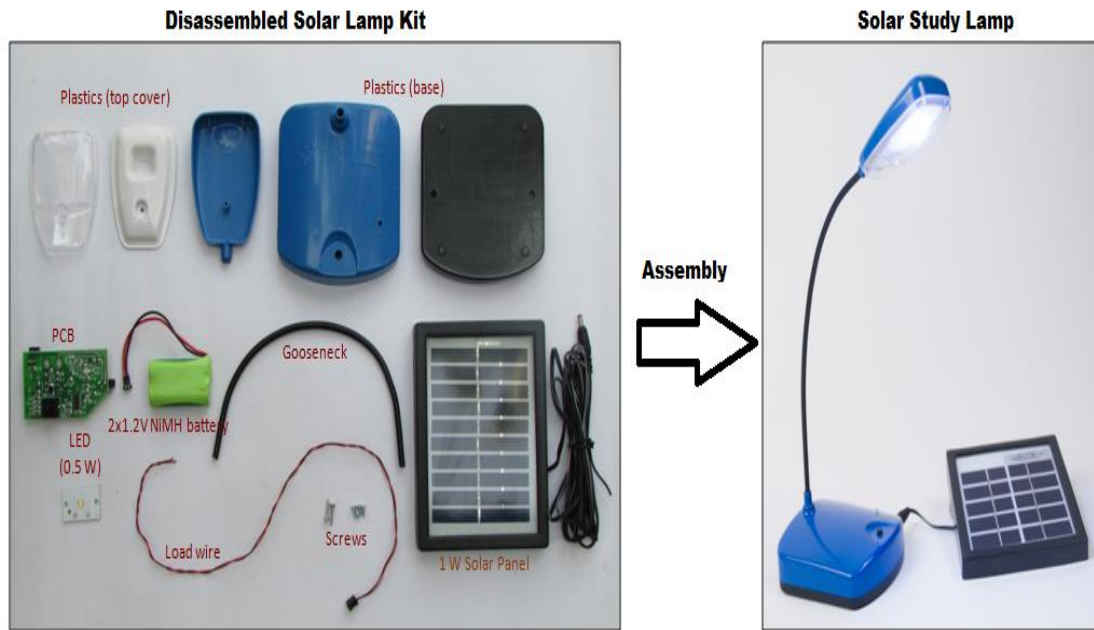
Disassembled Kit to Assembled Solar Study Lamp
